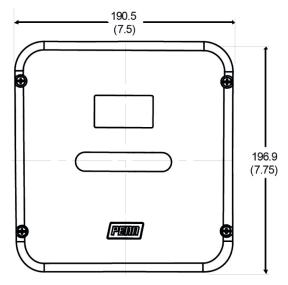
A5xx Controller rear panel with mounting hole dimensions in millimeters (inches)
